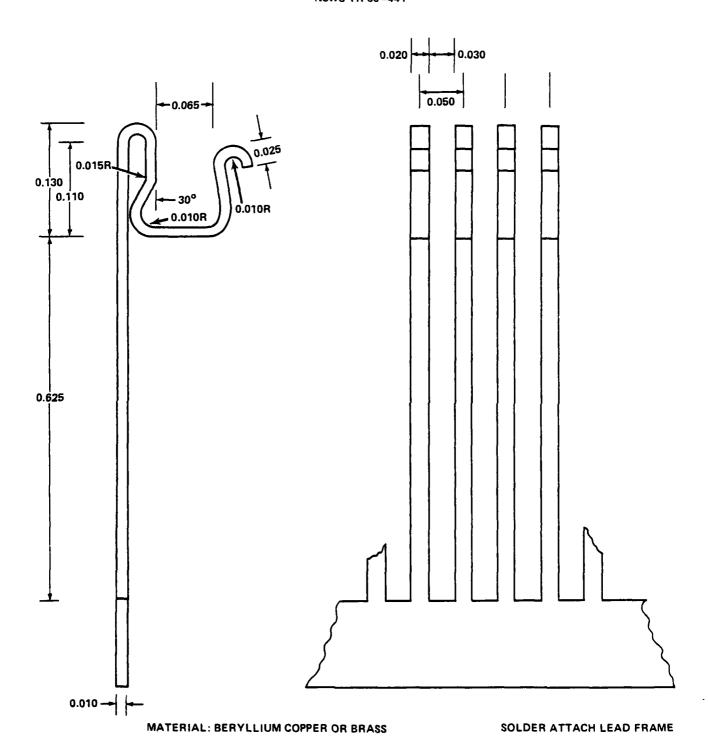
SOLDER ATTACH LEAD-FRAME DESIGN
